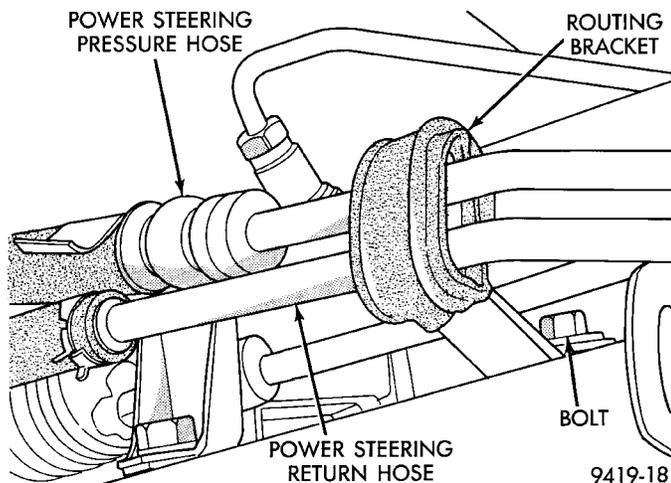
Power Steering Pressure And Return Hose Routing Bracket
